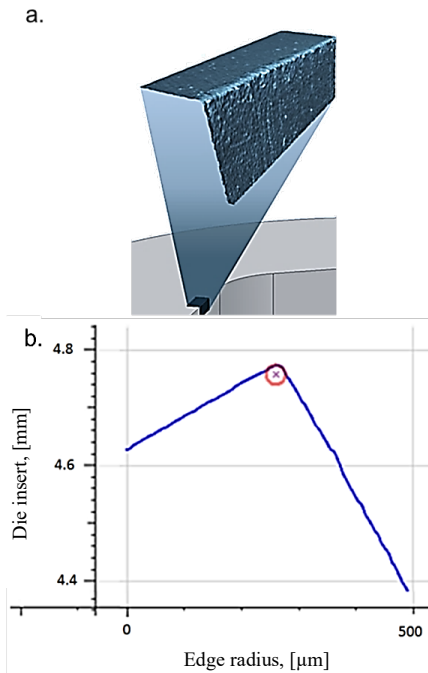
(a) Measurement on edge radius of forging die inserts used to determine wear; (b) graph showing the measurement of the edge radius of the die insert
